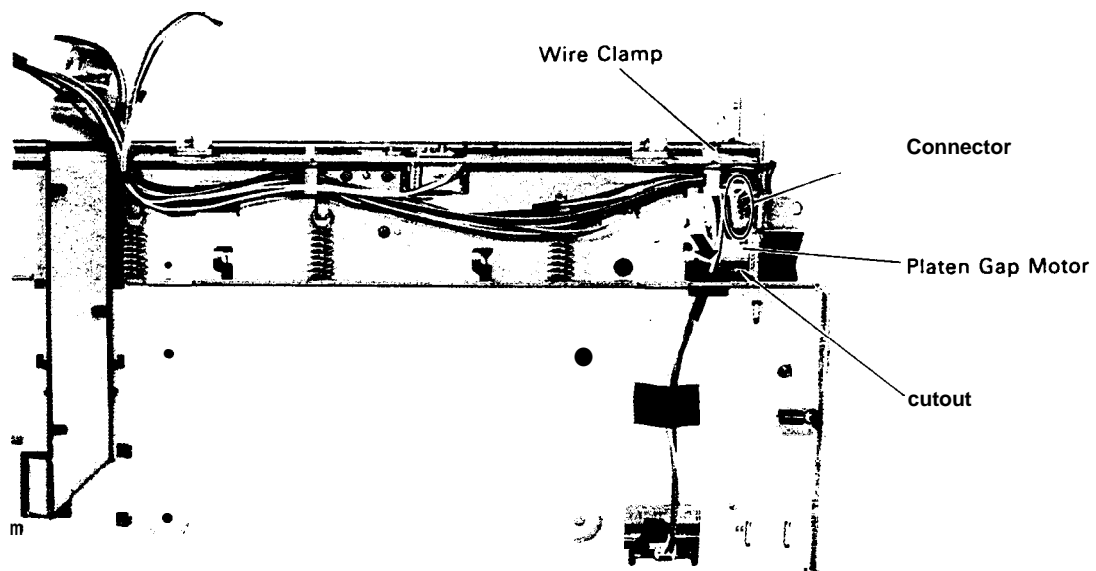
Platen Gap Motor Removal (Back of Base Frame)
